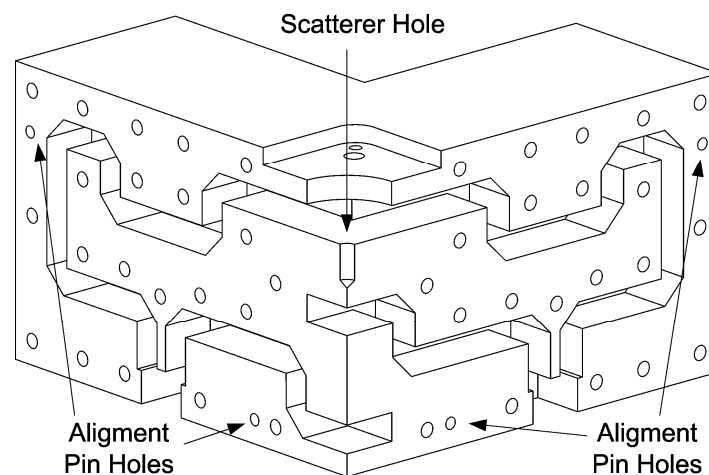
Internal faces of one orthomode transducer quarter. The scatterer hole thread is made at the final step with all the parts assembled.
